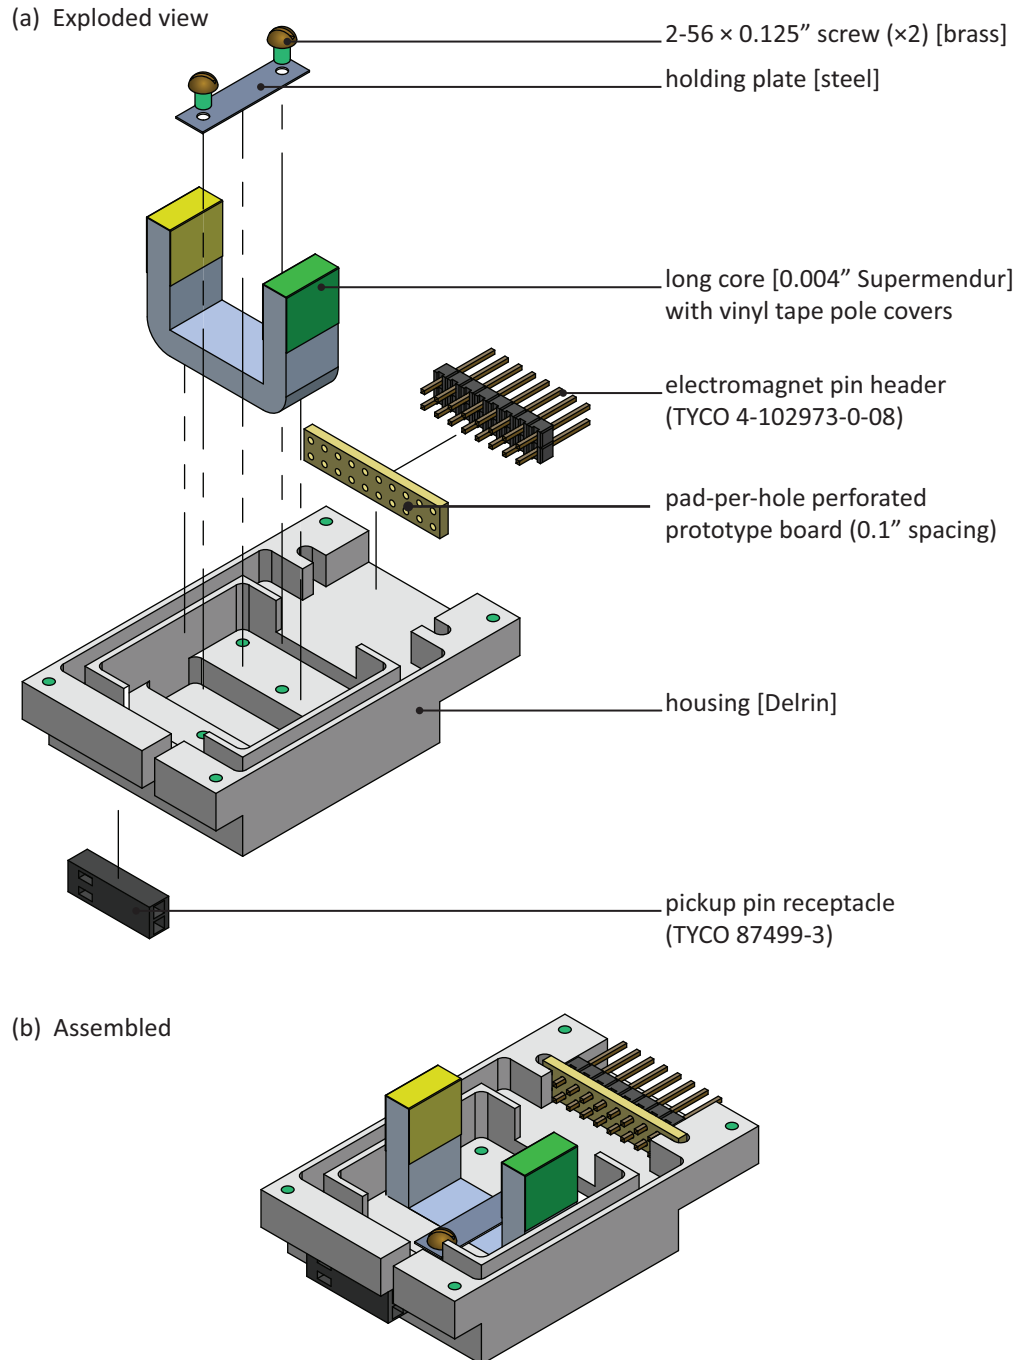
Long core assembly (a) exploded view, and (b) fully assembled. Component materials are identified in square brackets. 1:1 scale.
